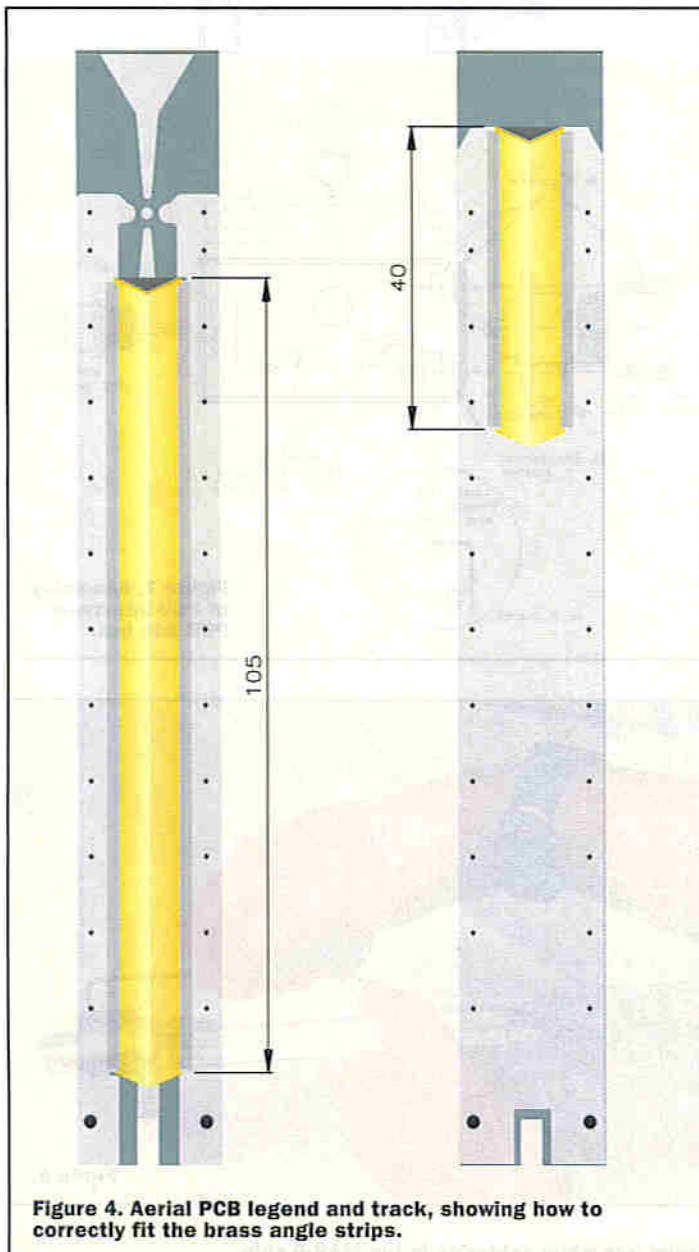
Aerial PCB legend and track, showing how to correctly fit the brass angle strips.
